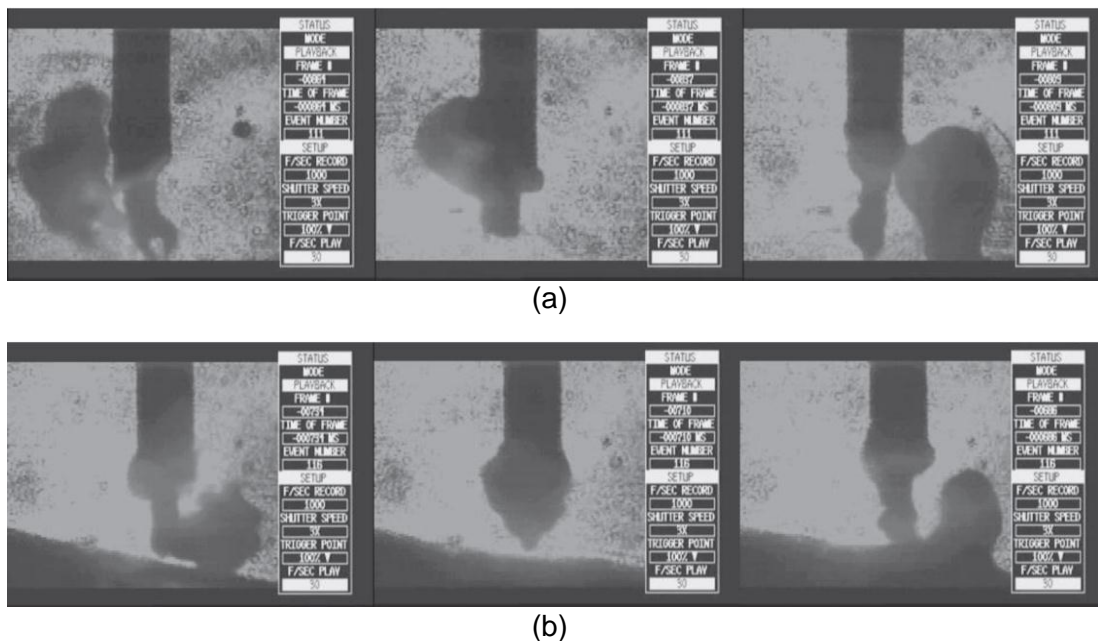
Image sequence captured during metal transfer of a rutile wire for a current around 160A. (a) Welding with 100% CO₂ (b) Welding with 75% Ar-25% CO₂ [2]
